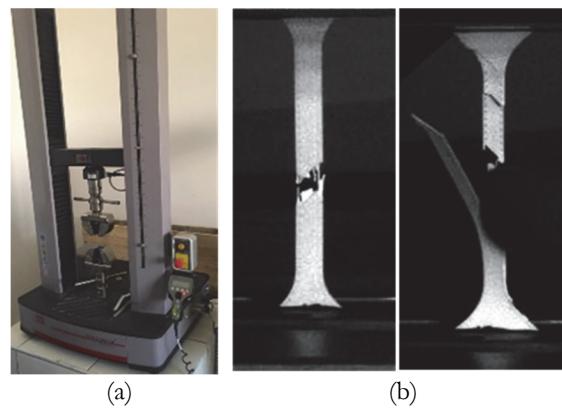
Tensile test machine; (b) tensile test results for delaminated samples.
